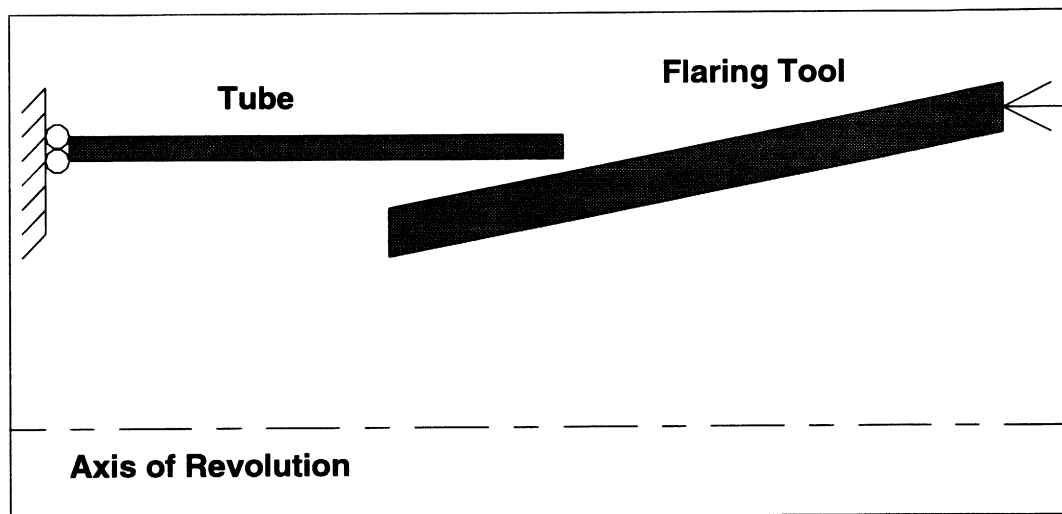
Axisymmetric Model of Tube and Flaring Tool
